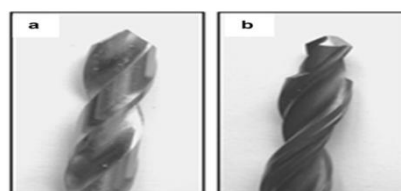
(a) Classical surgical drill (b) Step drill (two phase drill).
